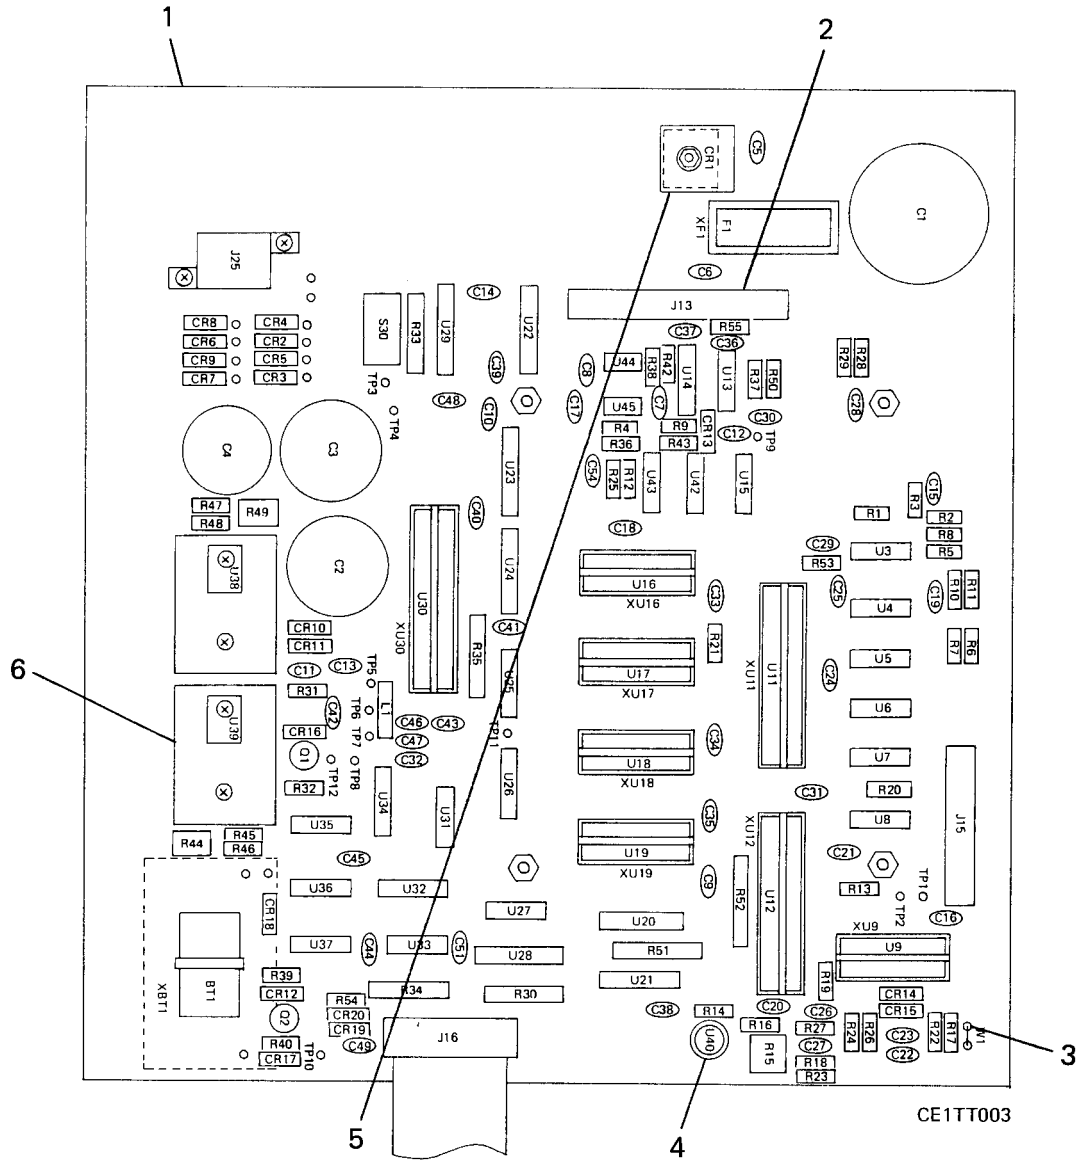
PCB Assy Processor (Sheet 1 of 6)
